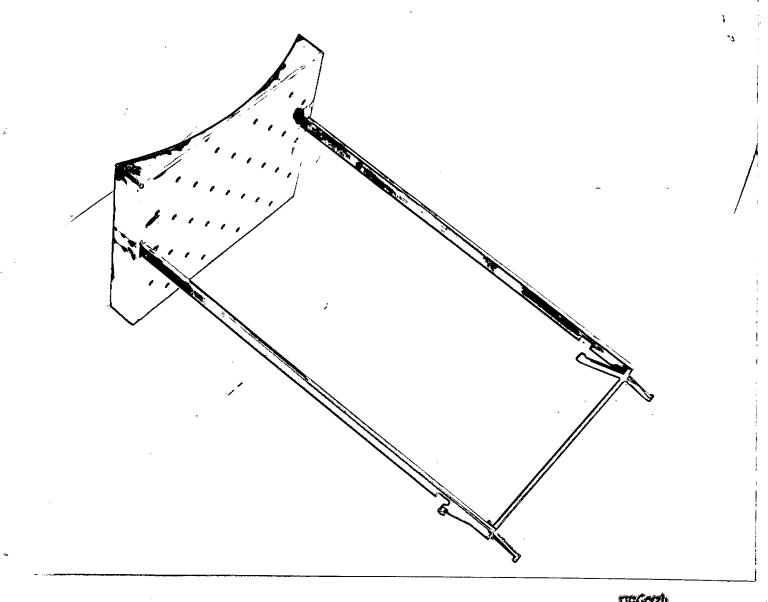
and 32 show the fire door which was febricated from stainless steel short and rod. The door was of hollow (double wall) construction. The side facing the loading chamber was a flat plate with a saries of holes of size and location such as to permit the cooling air to flow to and through the lowers in the curved plate which faced the inside of the incinerator. Thus, the air, at high velocity, passed through the hollow fire door when it was in the closed position, and cooled the surfaces and kept sacks and debris from entering the leading chamber.
